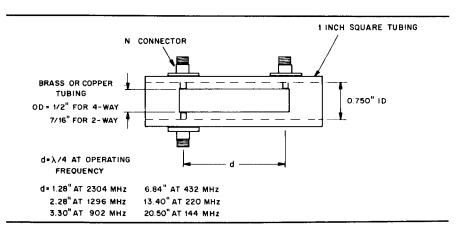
Construction details of a 1/4-wave, 2-way power divider.
